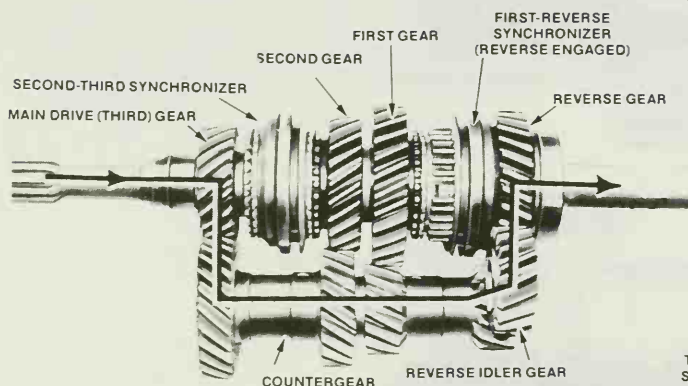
Power flow through a three-speed transmission in reverse gear. (Chevrolet Motor Division of General Motors Corporation)
